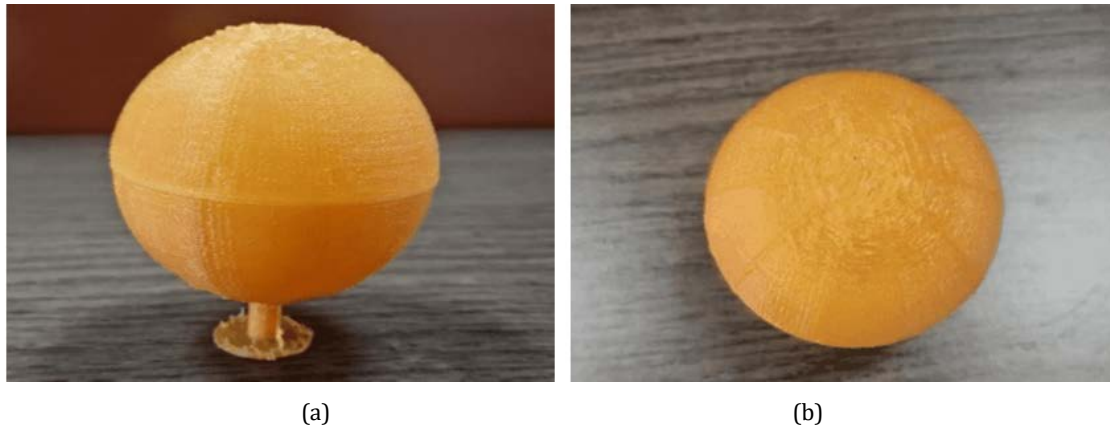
(a) Front view and (b) Top view of the 3D-printed spherical reflector model assembly
